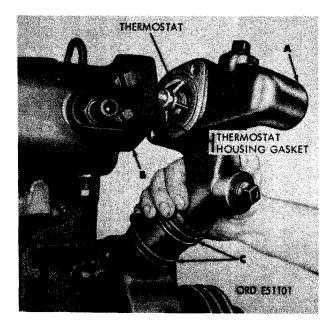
DISCONNECTING OR CON-NECTING THERMOSTAT HOUSING. (3) Figure 259. (A) Remove thermostat housing with thermostat. (B) Remove and discard thermostat housing gasket.(C) Remove the two 2-inch od hose clamps and hose from thermostat housing.
